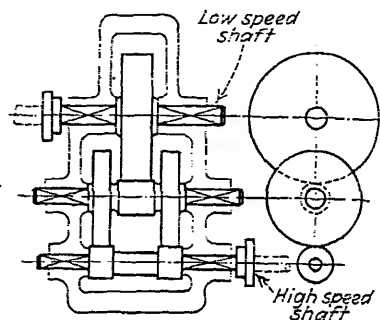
Arrangement of gear members in simple double-reduction gear unit.
